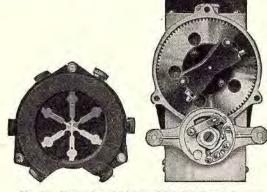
Front view of Dixie model "120" 12-cylinder magneto. Note the distributor to the left and the distributor rotor and gear which is placed behind it and which drives the distributor rotor and which is driven from a gear on a rotating pole shaft. Note that the distributor rotor is arranged differently from (2) in Fig. 31, a 4-cylinder rotor.
